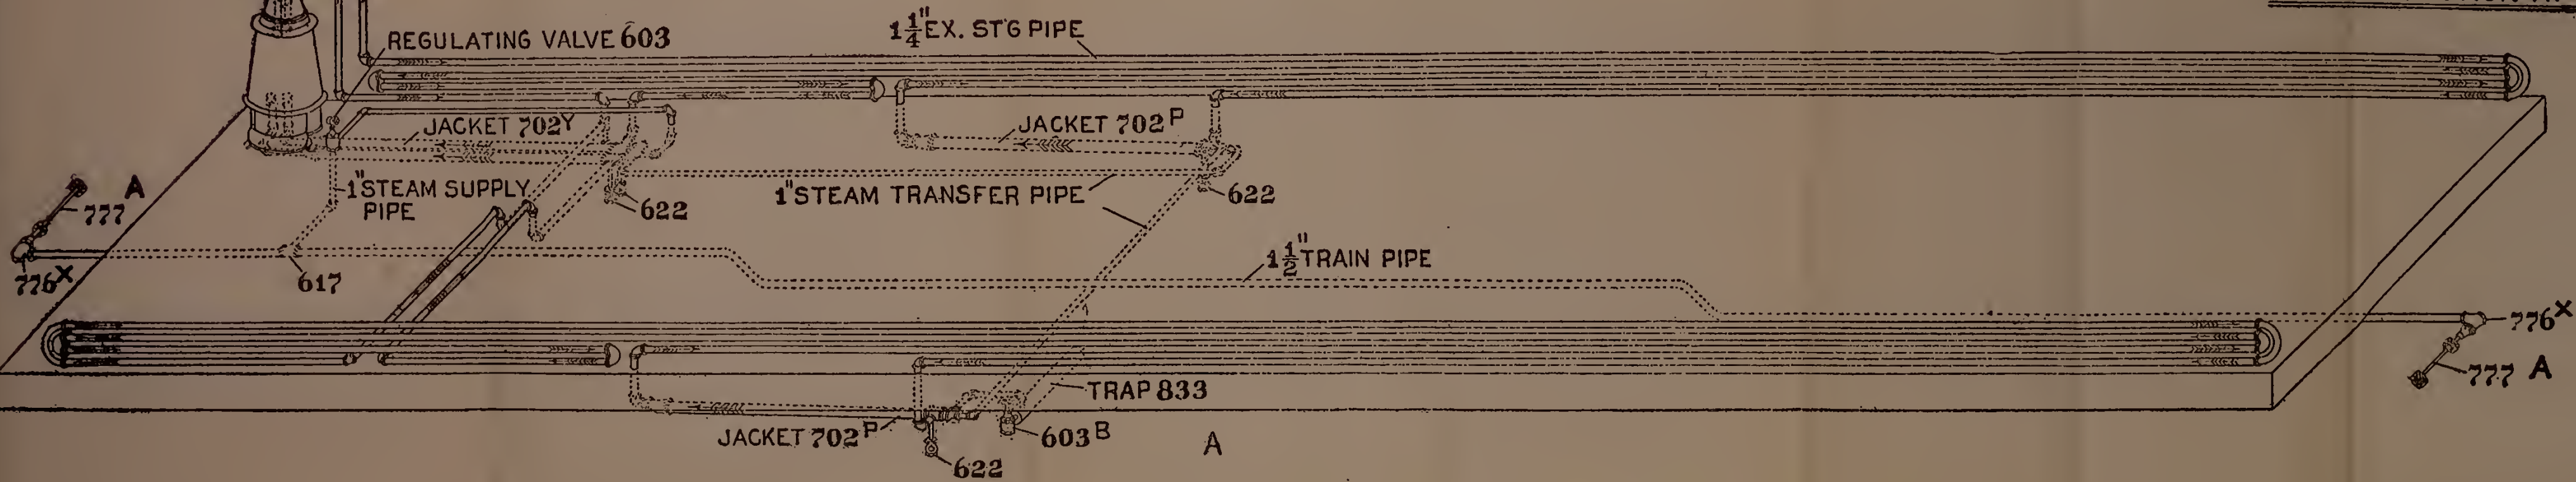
Design showing Standard Heating System as used with Double Circulation Baker Heaters.
